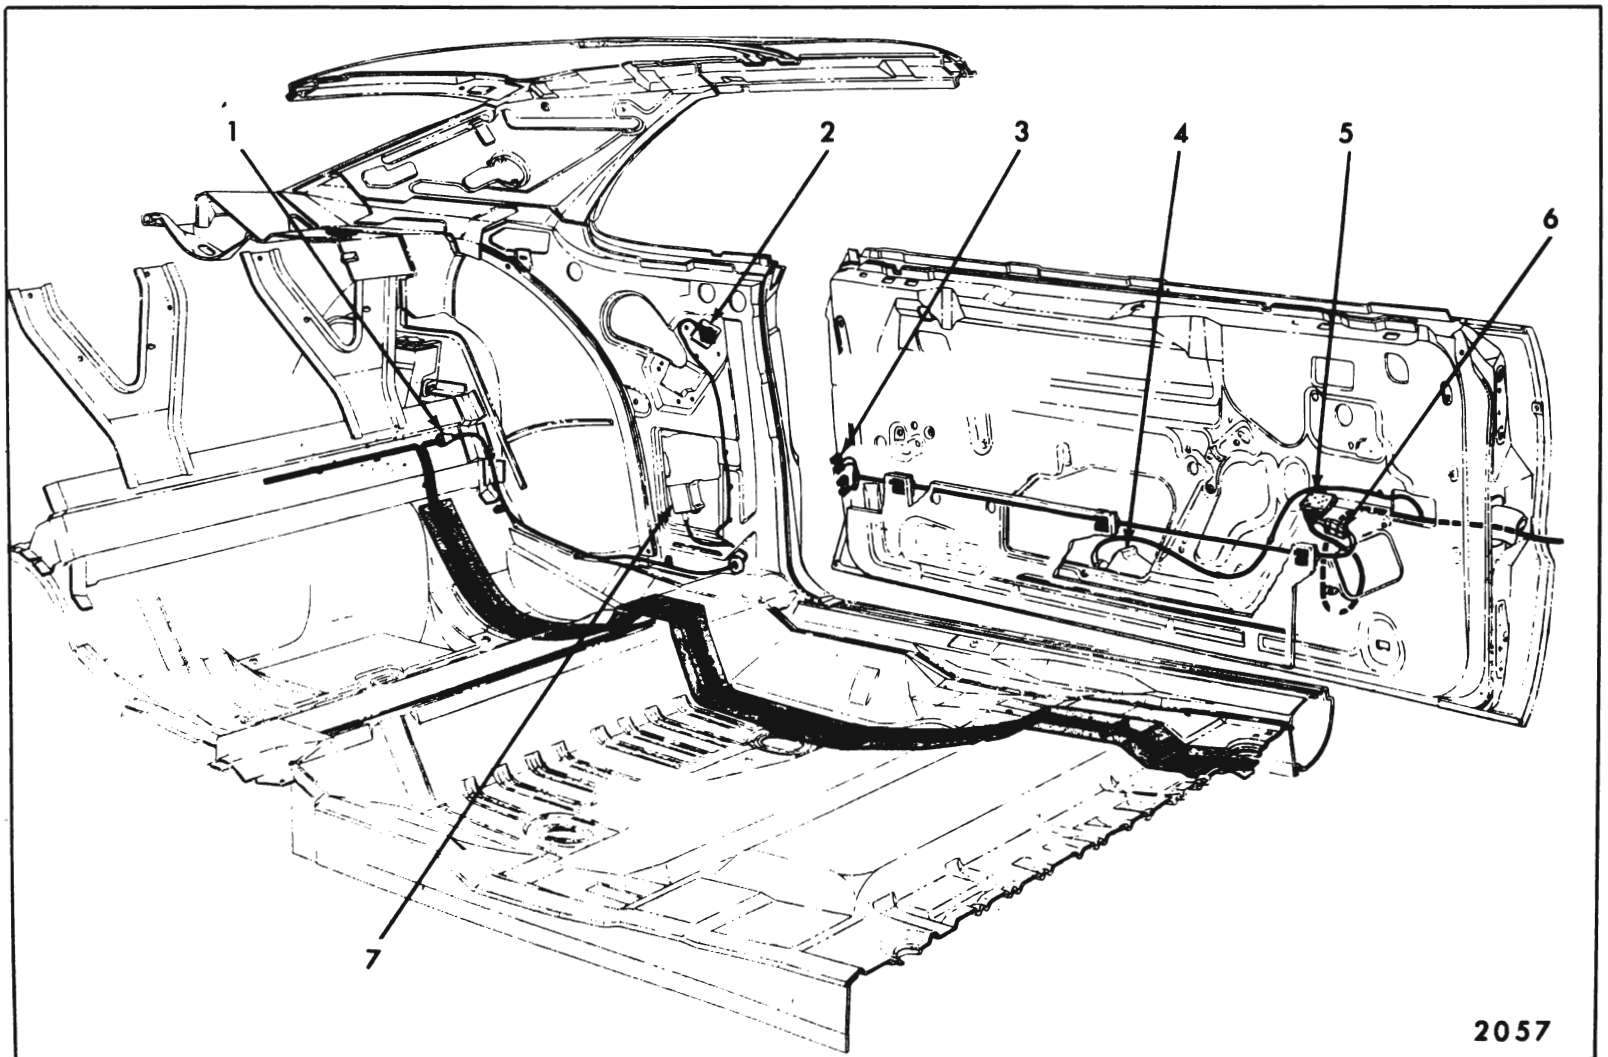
Left Side Power Window Wiring - Oldsmobile "E" Optional
